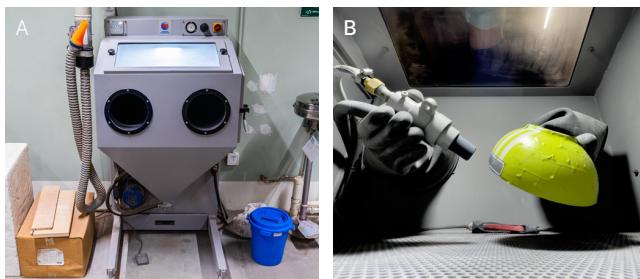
A: Kompac Blaster sandblasting machine. B: Machine interior.
